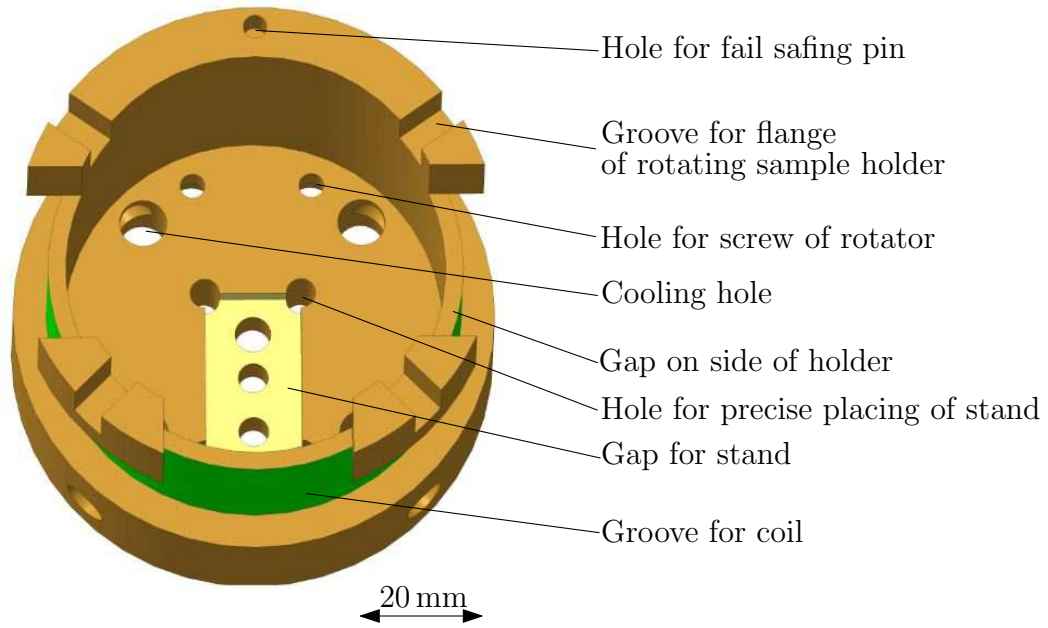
The housing of the rotating sample holder is the main part of holder. The shape of it is adapted to other components placed inside.
